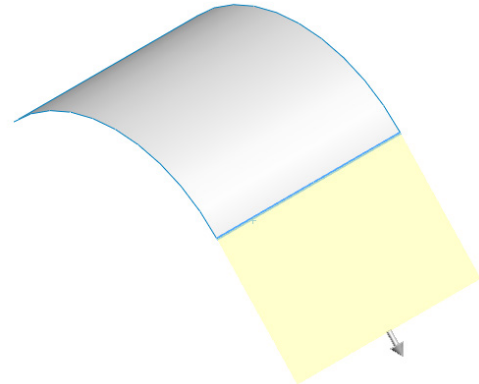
Preview of the extended surface with the Linear radio button selected
